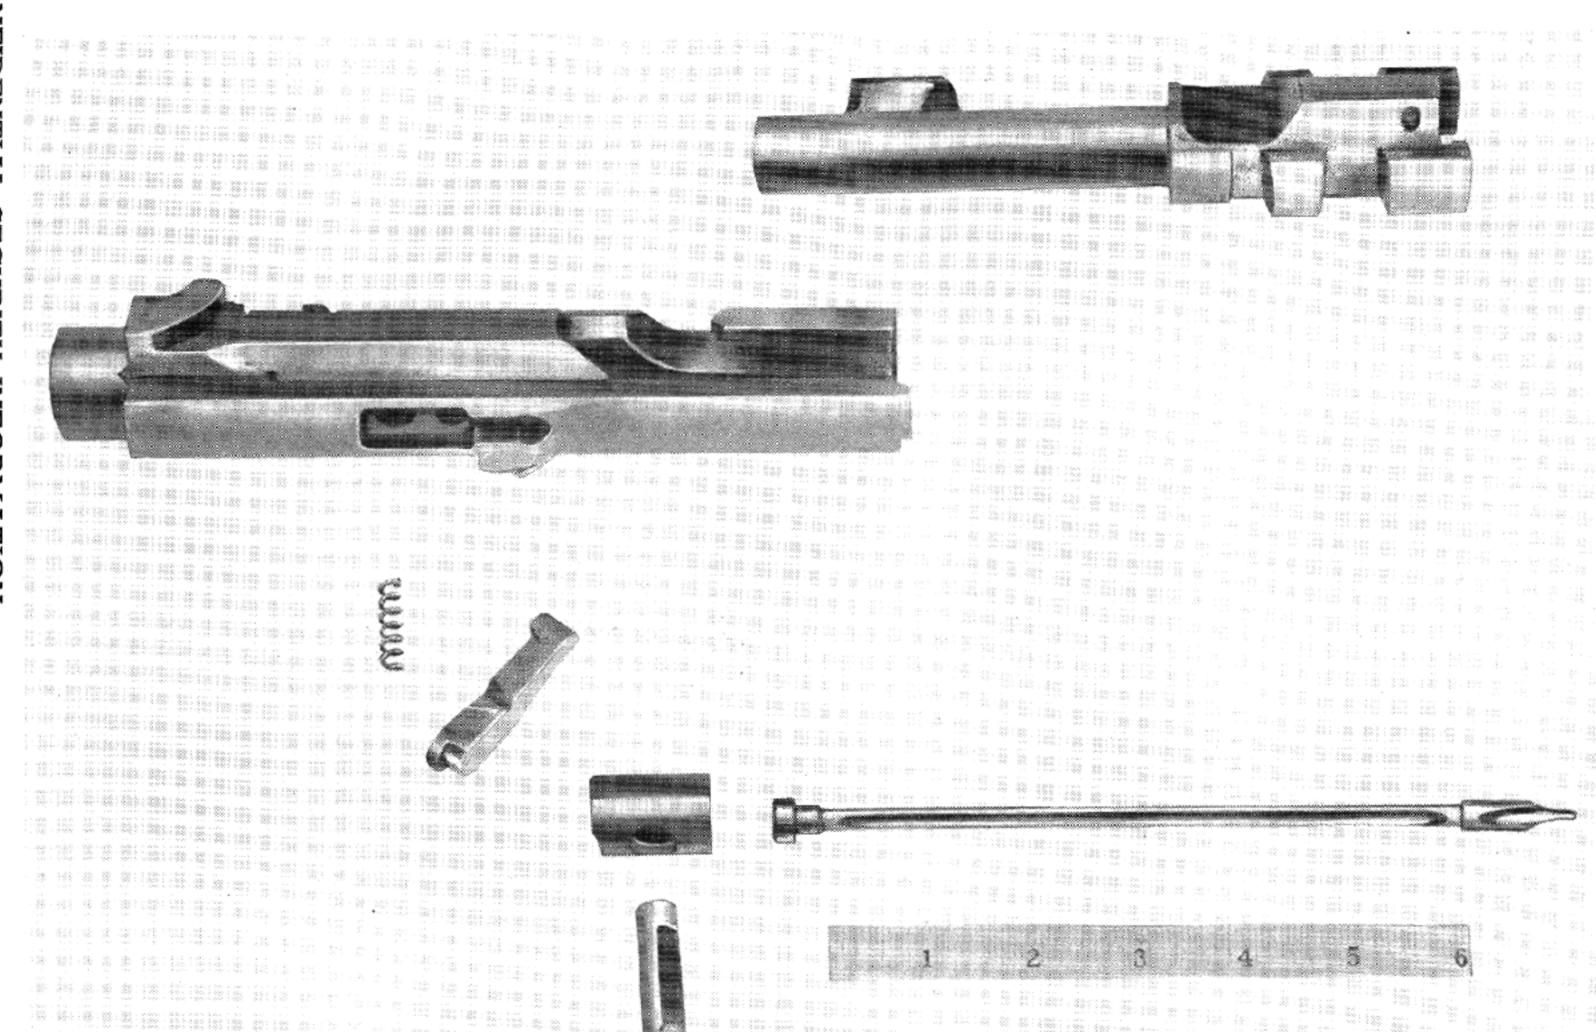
View of disassembled bolt for 23-mm NS Gun.
